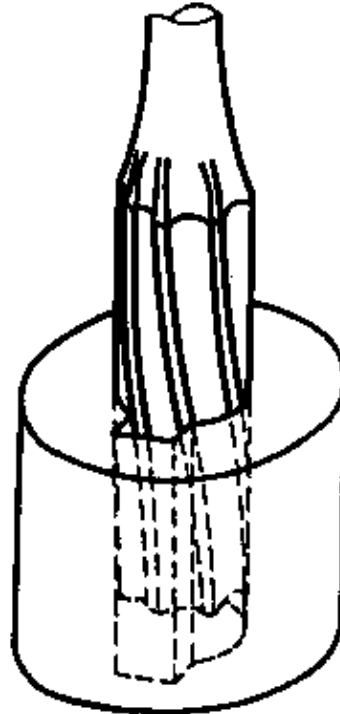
Spiral-fluted reamer applied to a bore hole with feather groove
